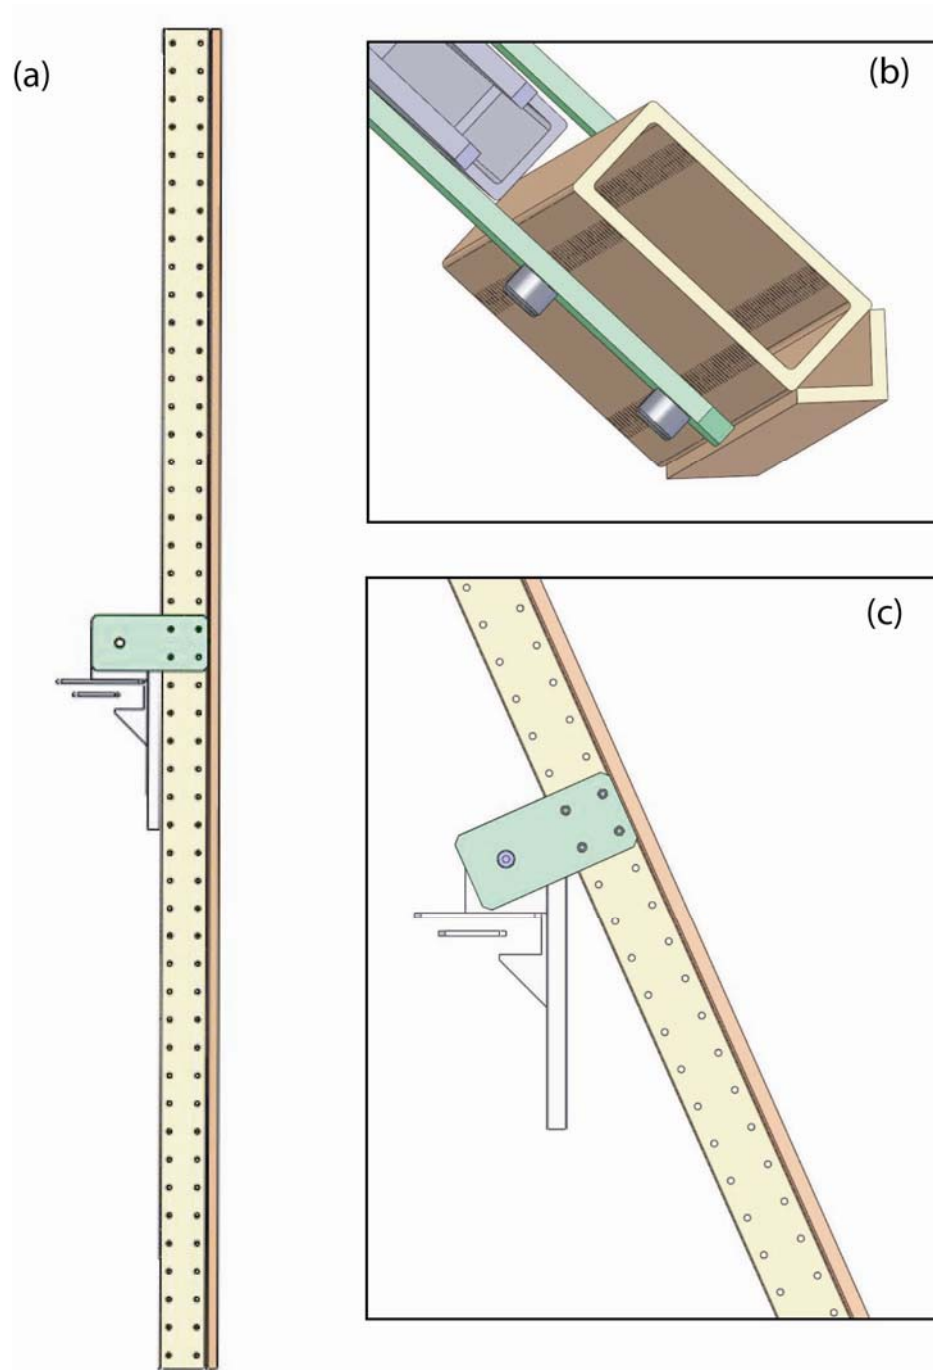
Computer generated drawings of the flow-instrument boom assembly: (a) in side view showing the mount to the boat, (b) an isometric view showing the mast cross section, and (c) the boom rotating around the pivot during instrument deployment (illustrations by S. Cunningham).
